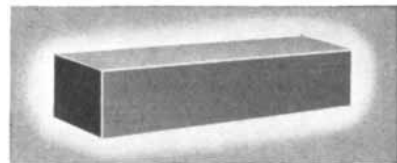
Gage blocks made of cemented carbide. Surface finish of .0005".
